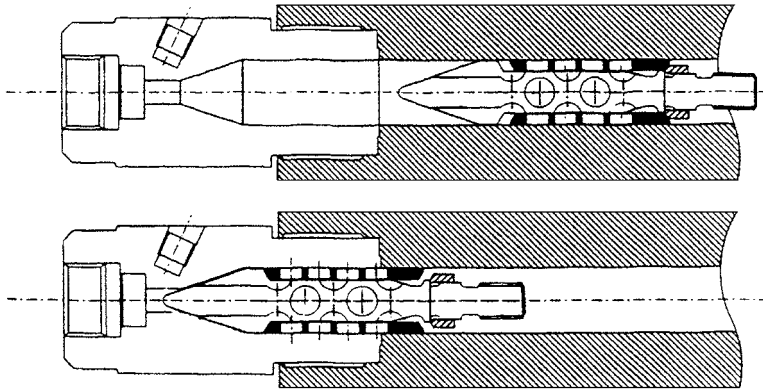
Check ring mixer in forward and rear position with bore extended into nozzle.
